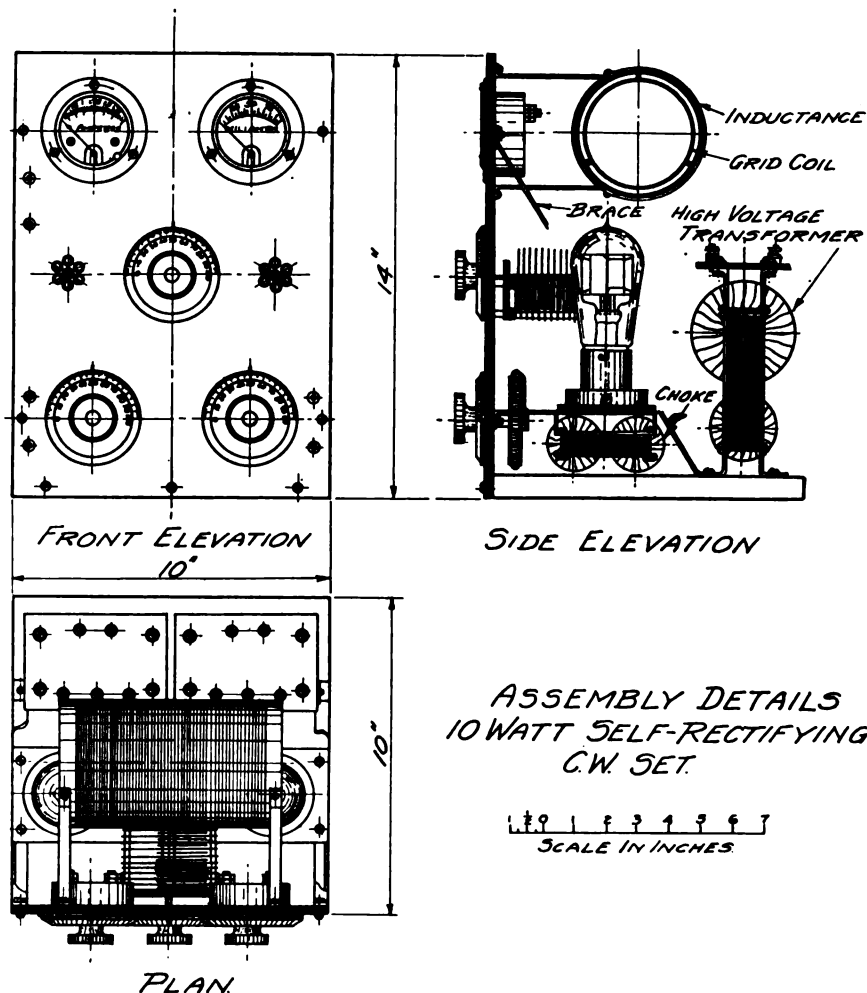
Assembly Details, 10-Watt Self-Rectifying C. W. Set
